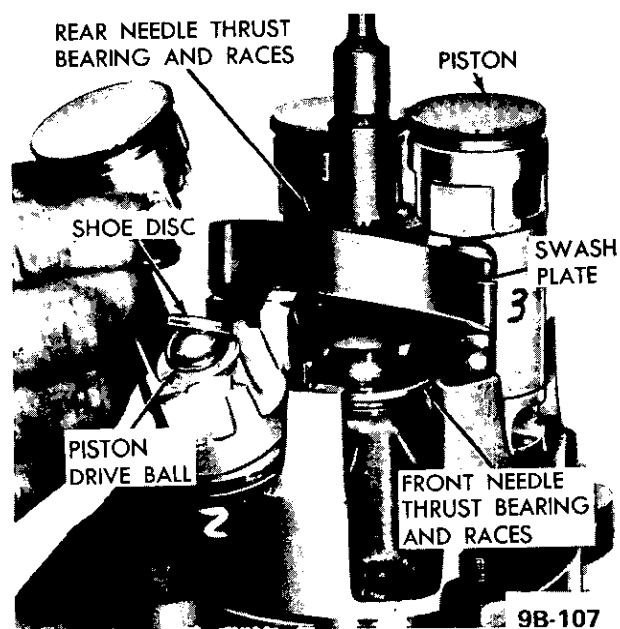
B-134 Disassembly of Cylinder Assembly - Service Pistons Shown
